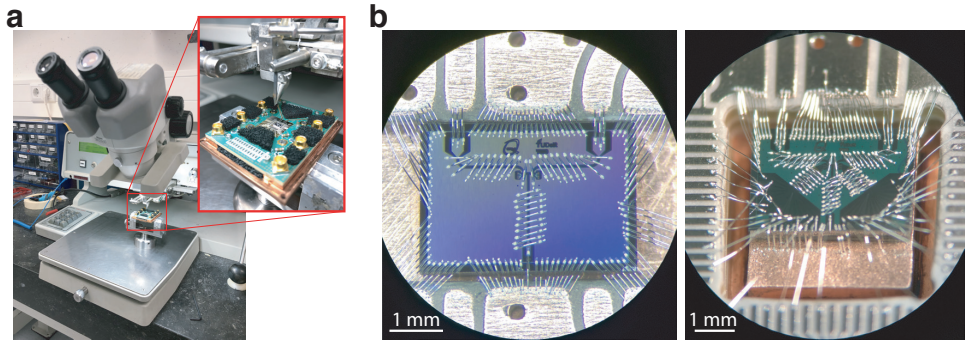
Wire bonding. a The Westbond wire bonder that is used to bond all the samples with Al wires to the PCB. b Examples of samples wire bonded to the resonator PCB (left) and hybrid PCB (right).
